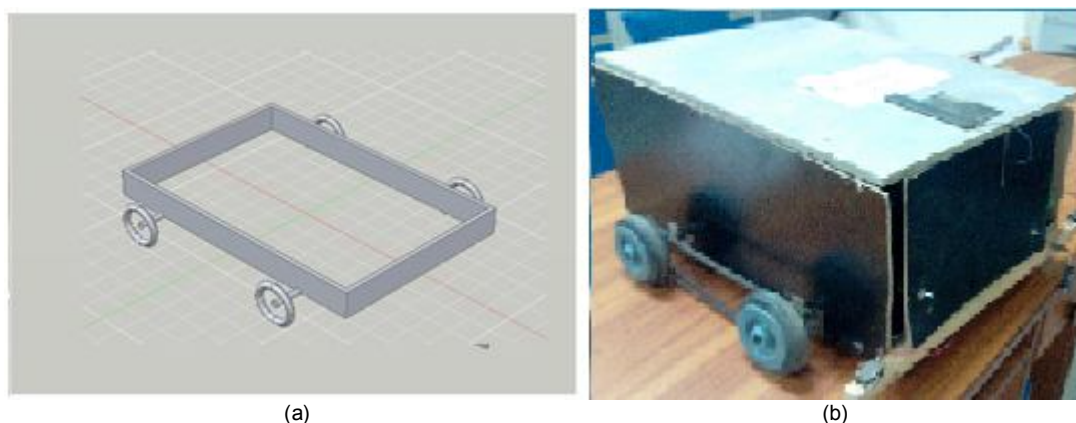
Wander Masterbot (a) CAD model (b) Fabricated prototype
